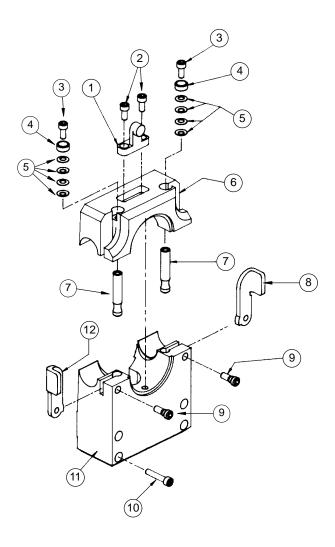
CWS-5FSP1 Special Purpose Fixture Block
